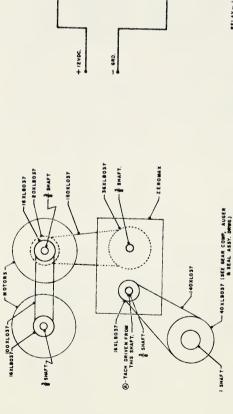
Auger dispenser drawing No. 4, component assembly.
